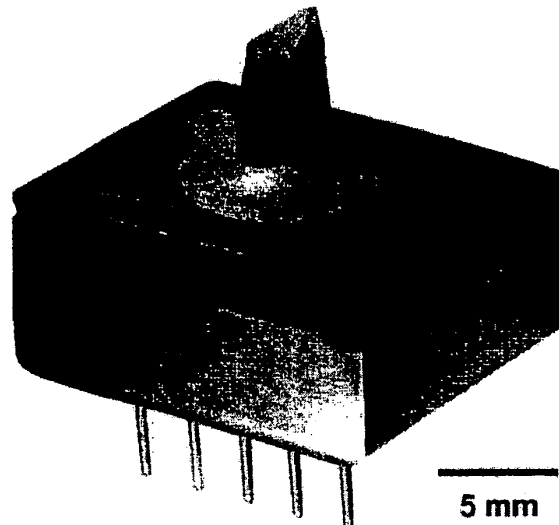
Laser-welded, evacuated gyrometer package
